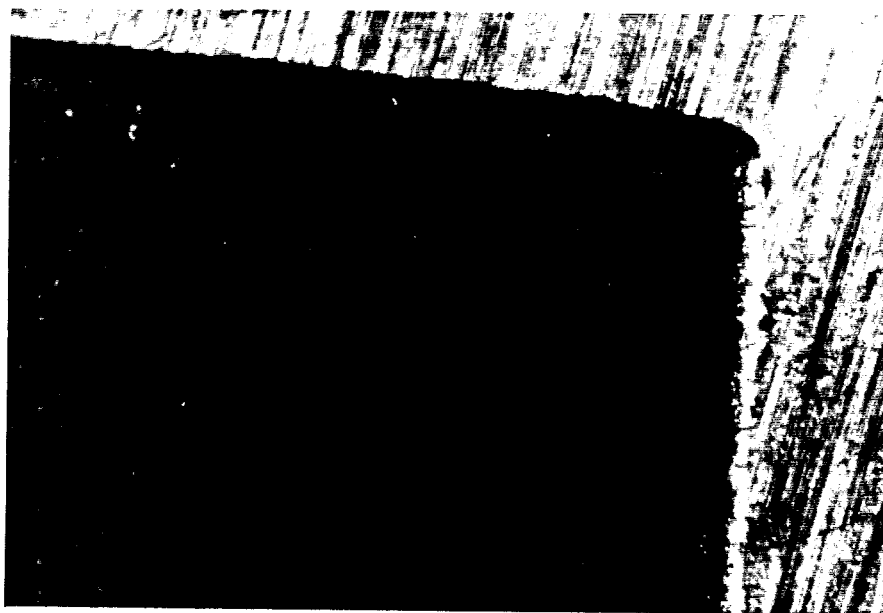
Surface Profile of 380 Die Cast Aluminum Pad Specimen No. 13
